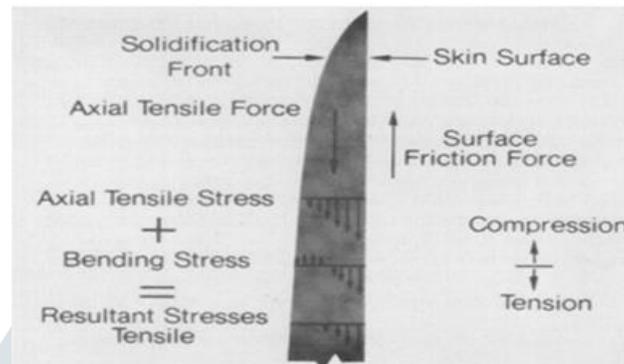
Schematic Drawing Of Axial And Bending Stresses In The Solid Shell Resulting From Friction In The Mold
